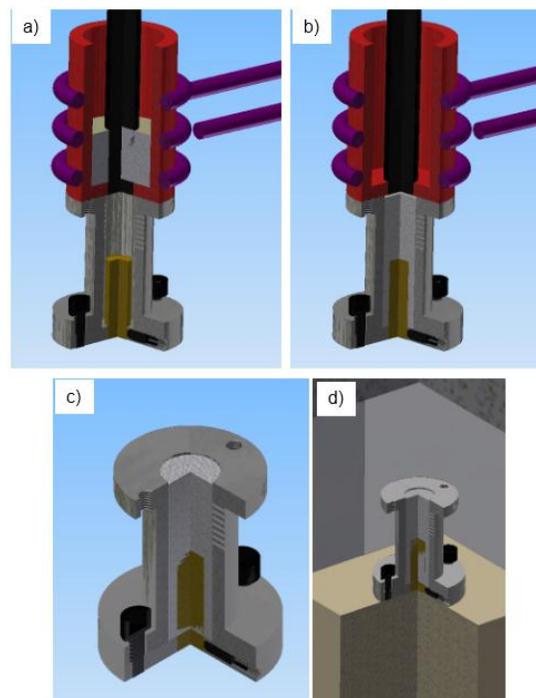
Schematic of new H13 mold testing a rod material coupon: a) induction melting of Al alloy; b) bottom pouring by lifting the stopper rod; c) removing the lower portion of the apparatus and d) placing inside the resistance furnace preheated at 700 °C.
